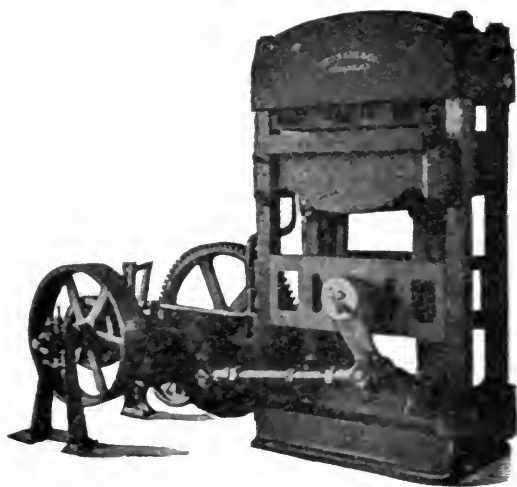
The Geo. H. Ohl Plate Embossing Press.
